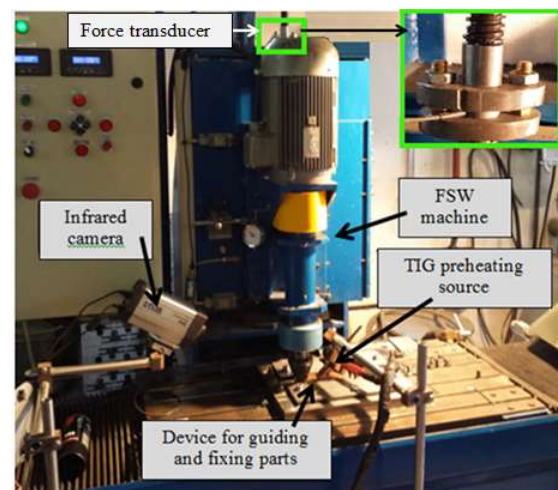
Experimental stand of TIG assisted friction stir welding process
